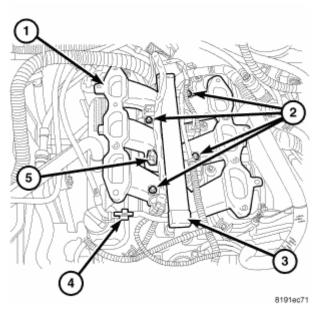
Fuel Rail 3.8L Courtesy of CHRYSLER LLC
